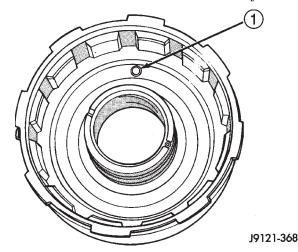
Front Clutch Piston Retainer Check Ball Location
